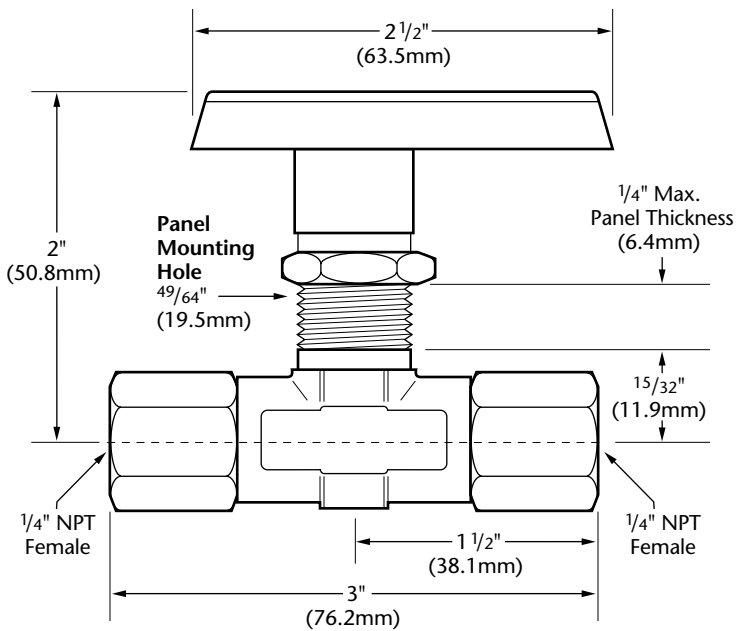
Models SG5602 and SG5622 Valve Dimensions
